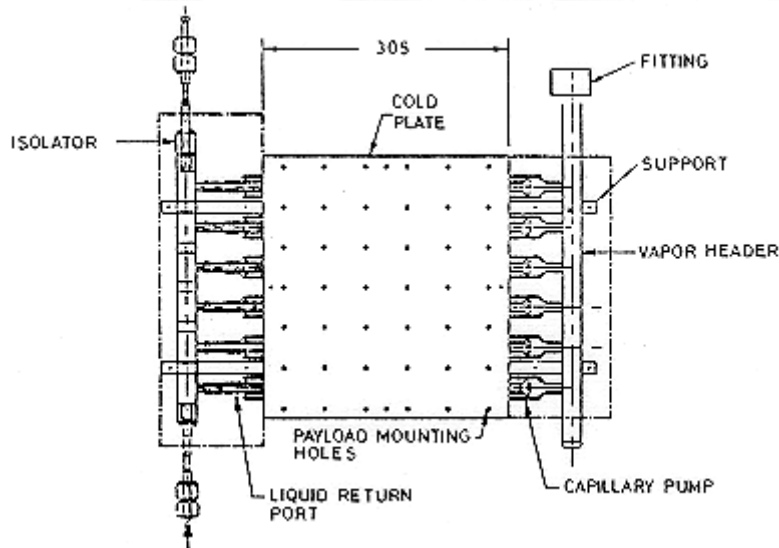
Prototype capillary cold plate (PCCP) design. Dimension in mm.
